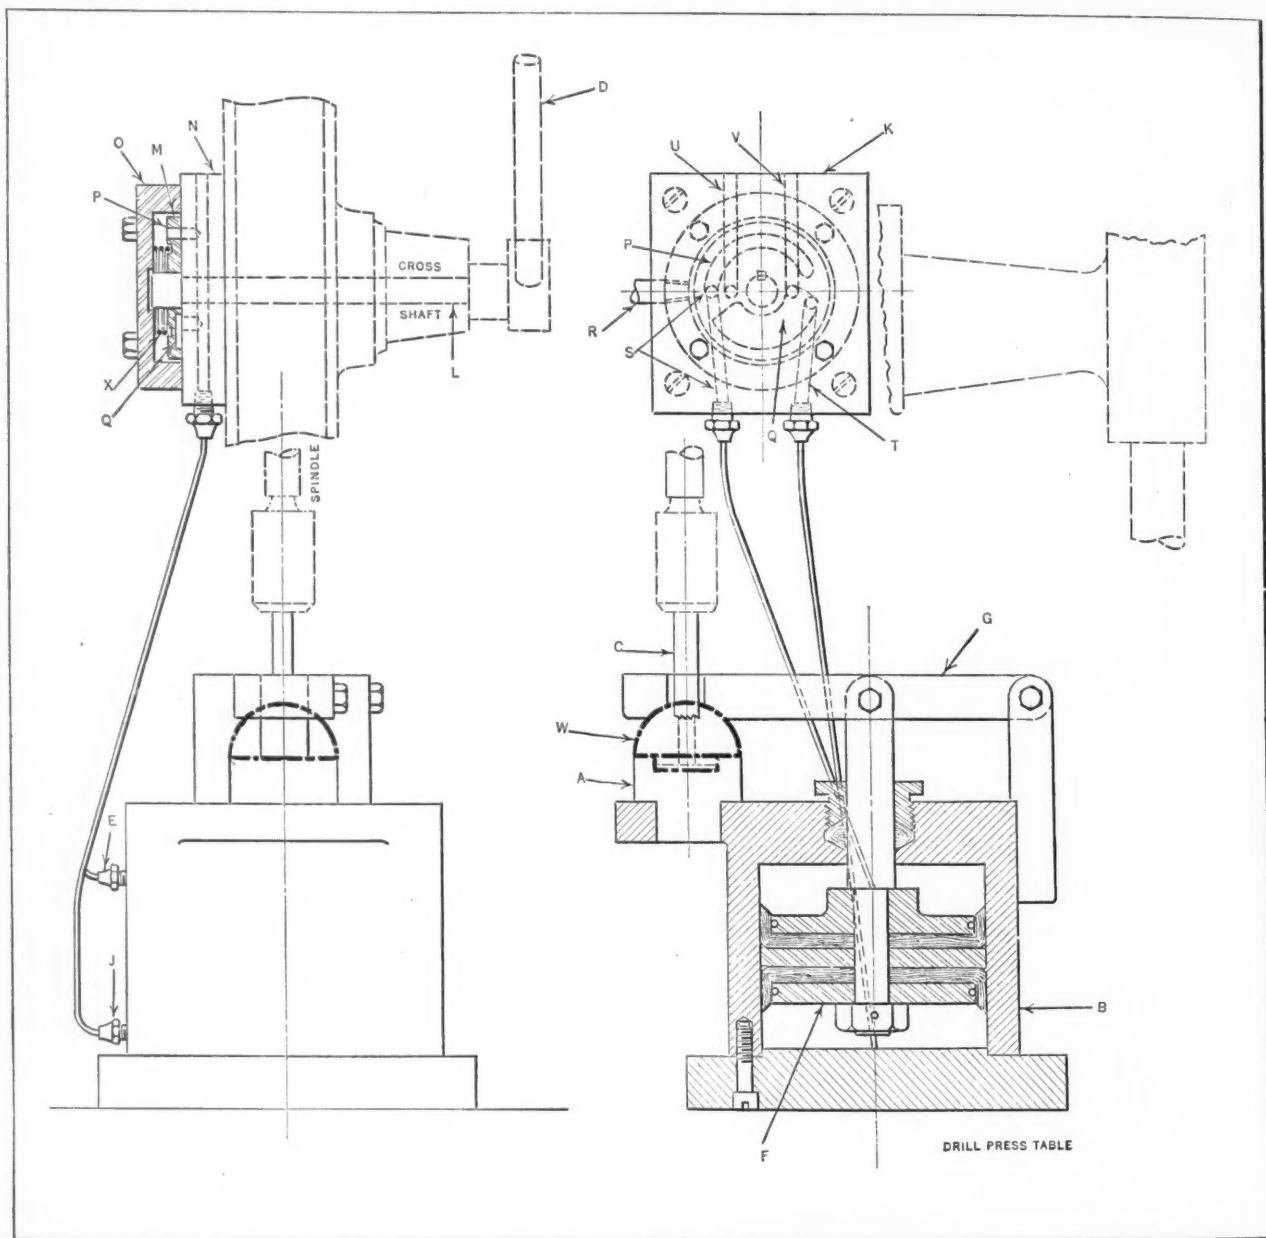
Counterboring Fixture Equipped with Air-operated Clamp
